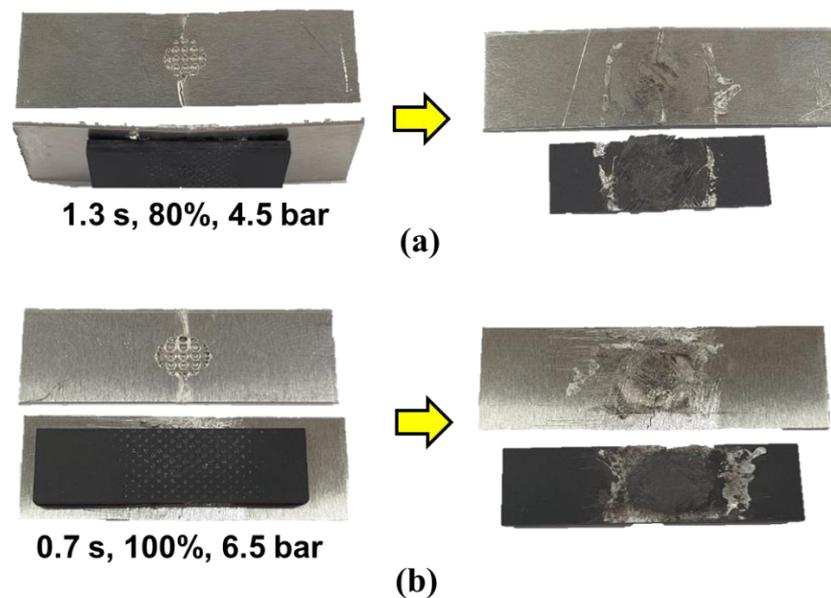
Ultrasonic welded A5052-H32 and GFRP with two different welding parameters. The images on the right show the joint interface after the joint separation. (a) welding time of 1.3 s, 80% vibration amplitude, and 4.5 bar of welding pressure. (b) welding time of 0.7 s, 100% vibration amplitude, and 6.5 bar of welding pressure.
